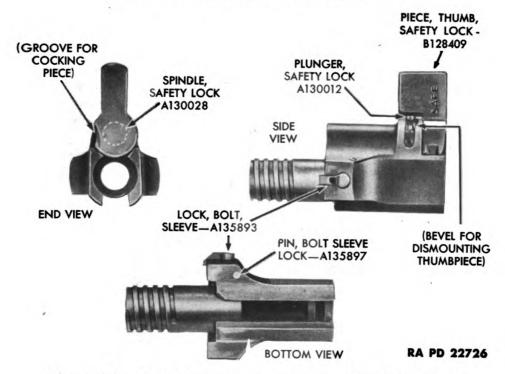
Bolt Sleeve Group of U.S. Rifle, Cal. .22, M2
